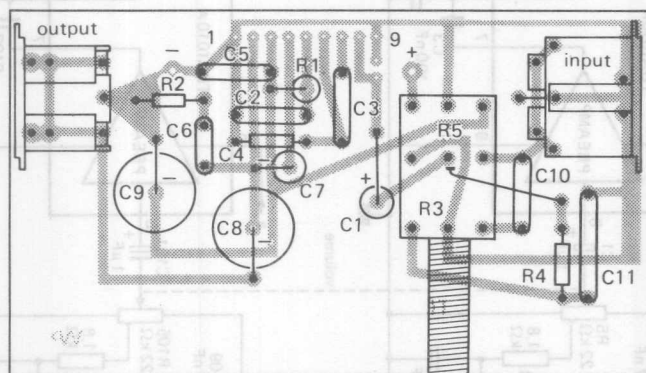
Component side of printed-circuit board showing component layout used for the circuit of Fig. 9.
